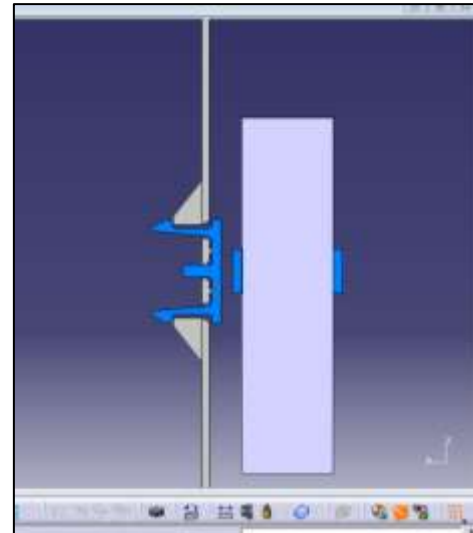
Section View of Modified Snap-fit Design (With locator)
